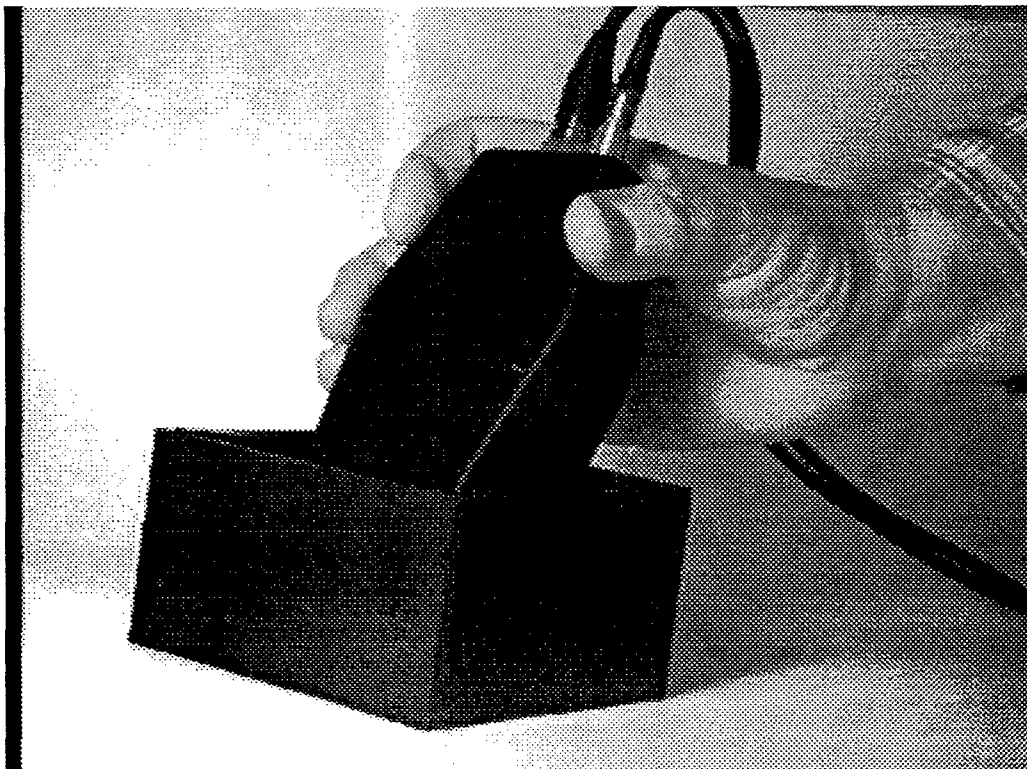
Earlier design for a yoke with protective shroud and imager of reduced-size nested in the yoke core. The final design (see Figure 11 below) involves a smaller yoke and shroud. We are also currently producing a design that involves a “right-angle” version of the imager (see Figure 1b in the attached ASNT paper—Appendix B).
